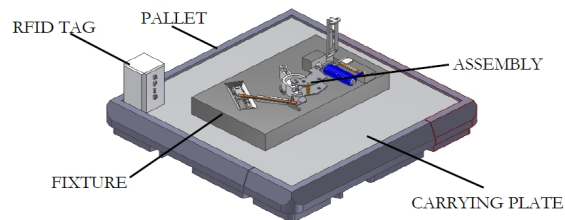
Pallet and fixture: CAD representation (Sequeira, 2008).
